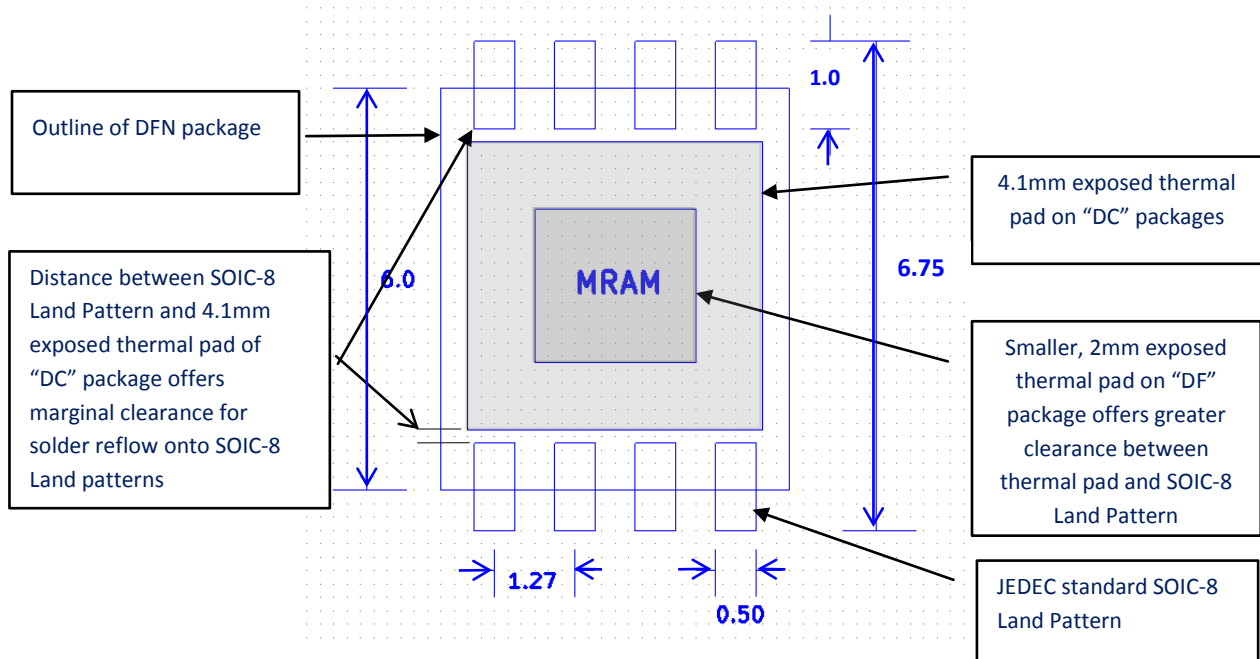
Dimensions of Everspin's "DC" vs. "DF" packages on JEDEC SOIC-8 Land Pattern
